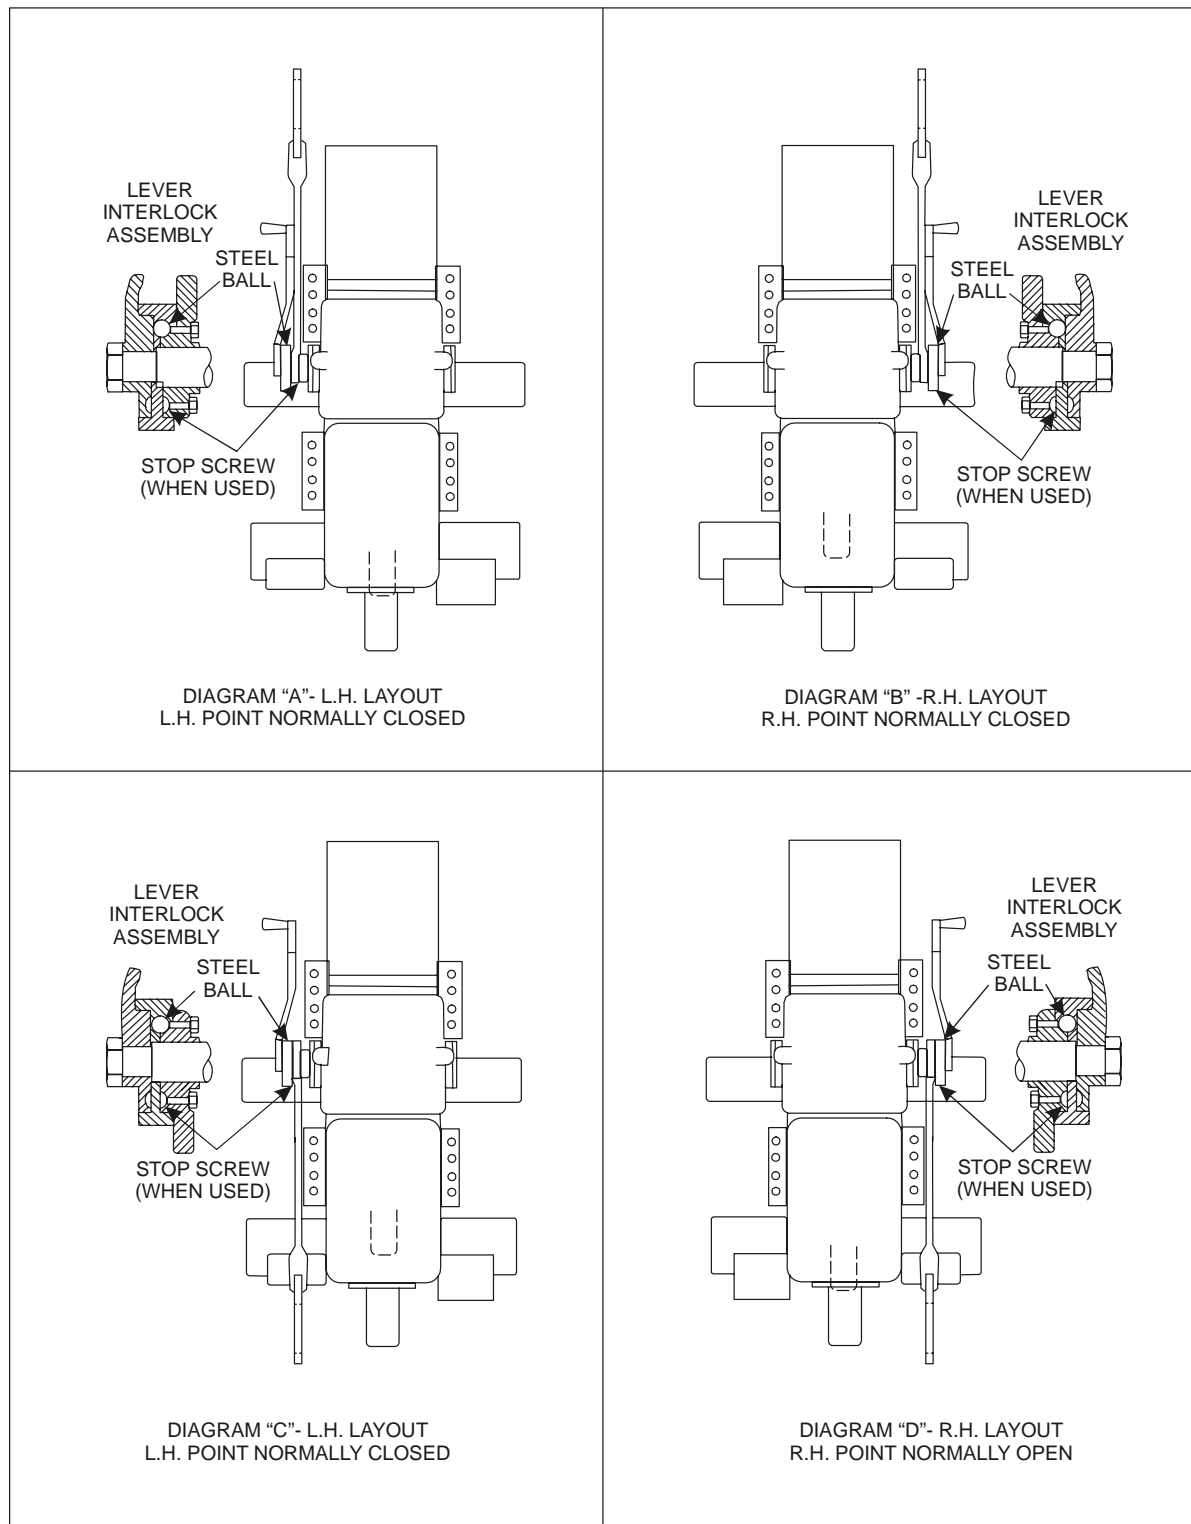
Standard Lever Interlock Assemblies for M-23 Switch Machine
